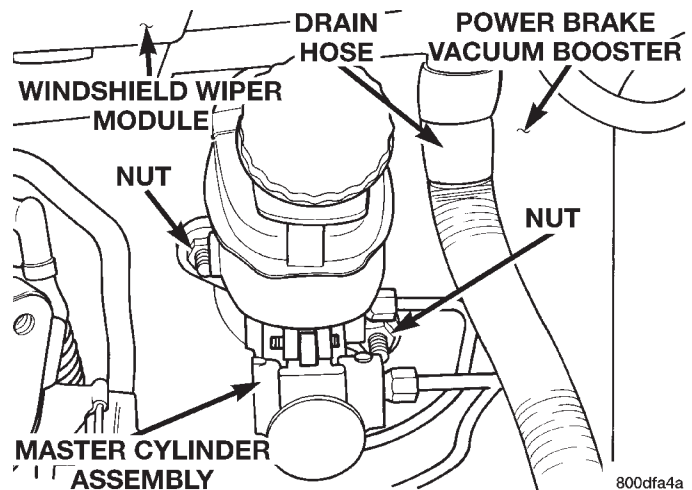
Master Cylinder Attachment To Vacuum Booster
